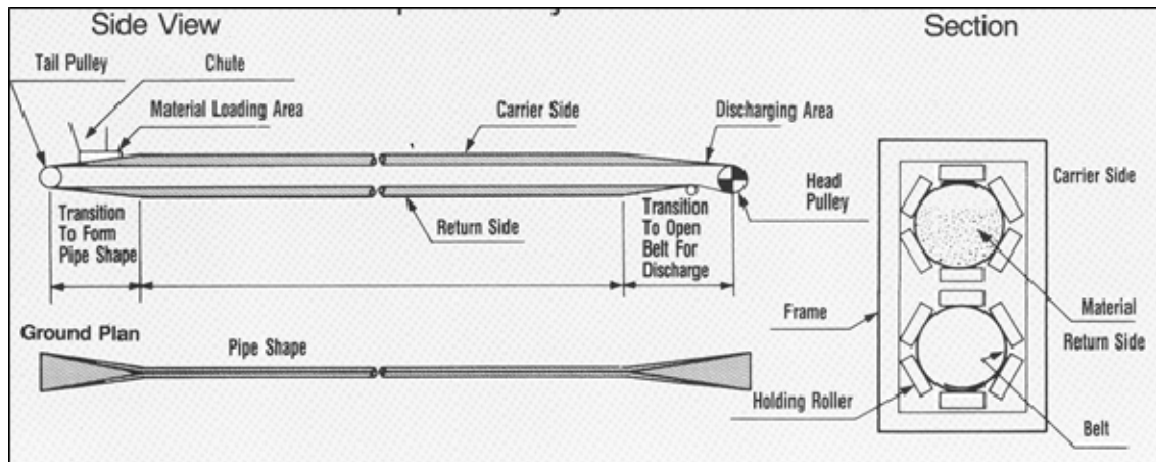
Bateman pipe conveyor layout (courtesy of Bateman Engineering Technologies)
